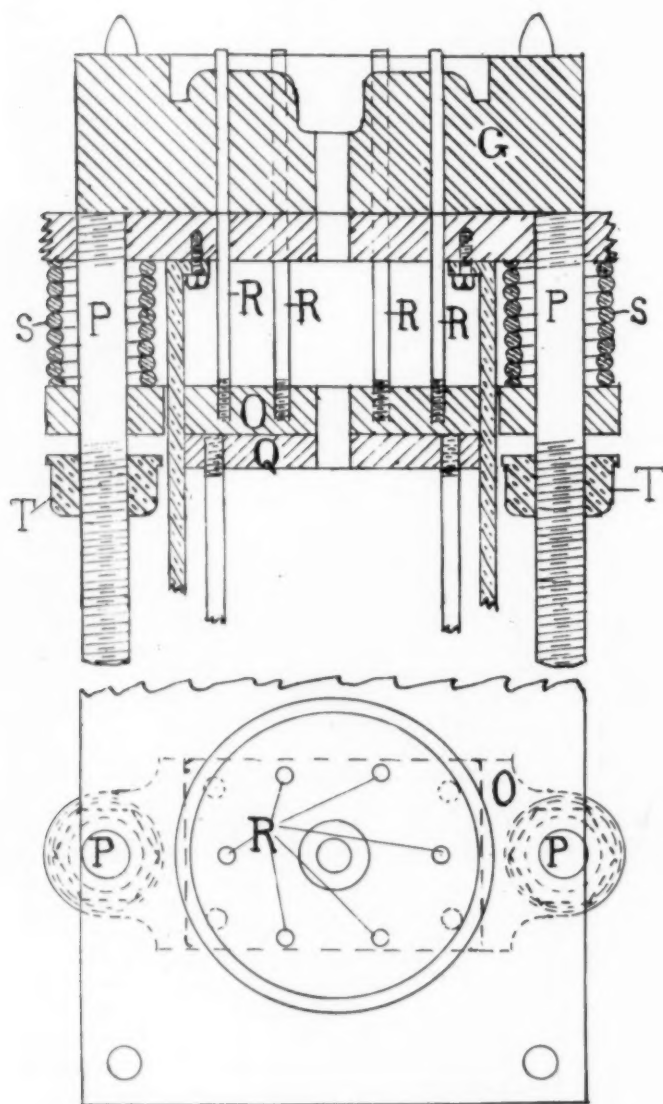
SHOWING THE CASTING EJECTOR MECHANISM.
